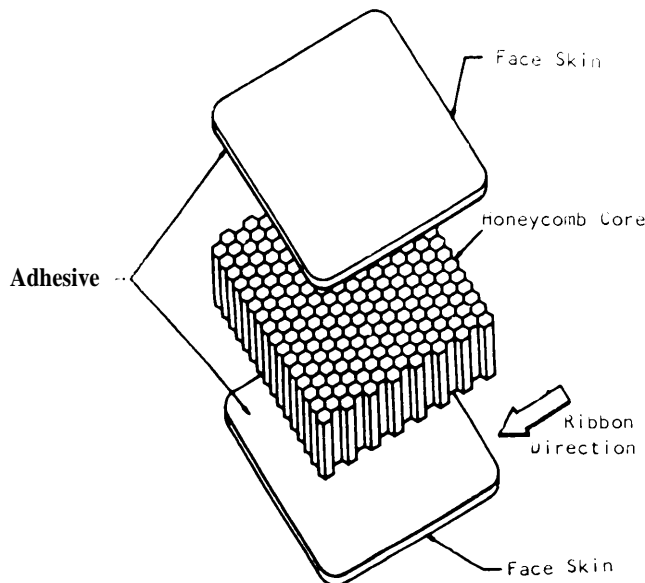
Typical Sandwich Construction (Honeycomb)
